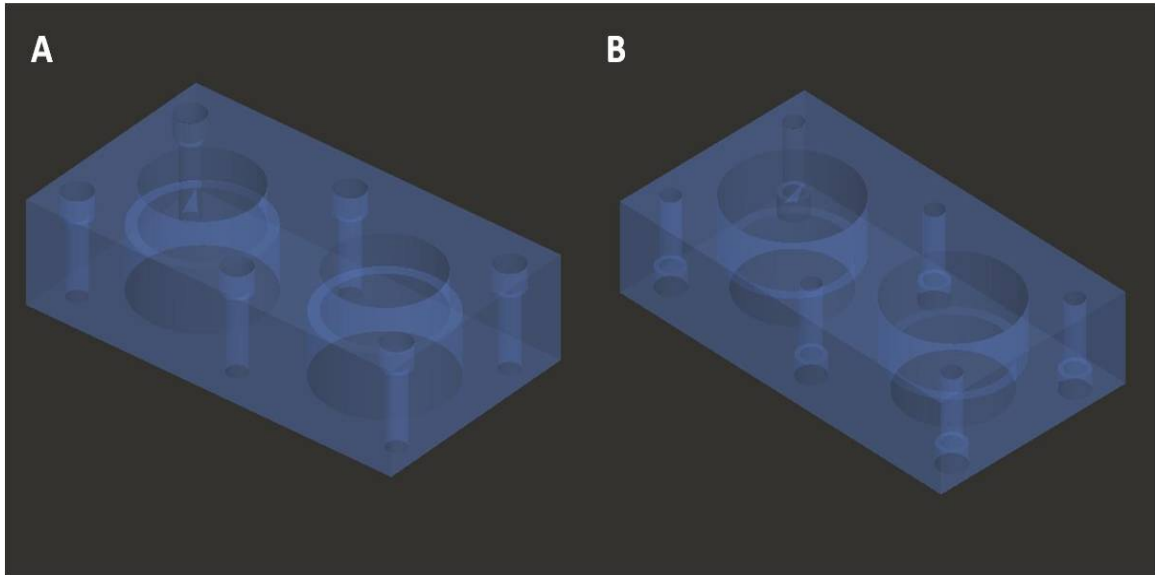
3D CAD model of clear plate. (A) The top surface of the clear plate. (B) The bottom surface of the clear plate.
